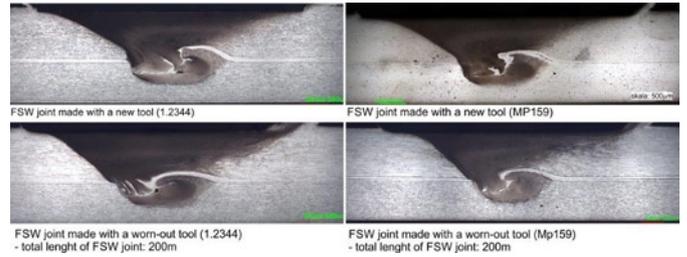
Cross-section of the FSW joints welded using new and worn tools
